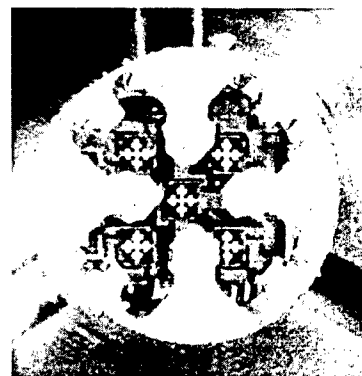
Assembly after the sealer is installed (sensors seen through the openings).
